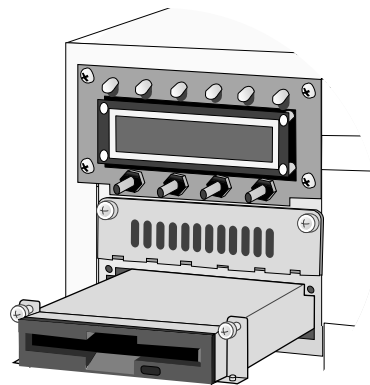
Removing the Disk Drive Mounting Bracket from the Extended Chassis
